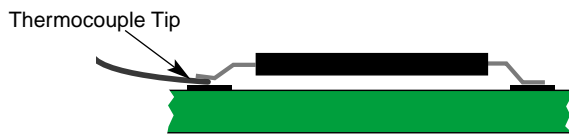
It is best to attach the thermocouple tip between a PCB pad and the corresponding component lead.
